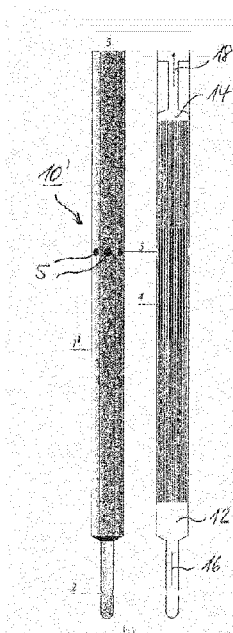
Schematic view of a sodium-cooled fast reactor fuel subassembly with traditional (a) and modified (b) design of the wrapper tube
